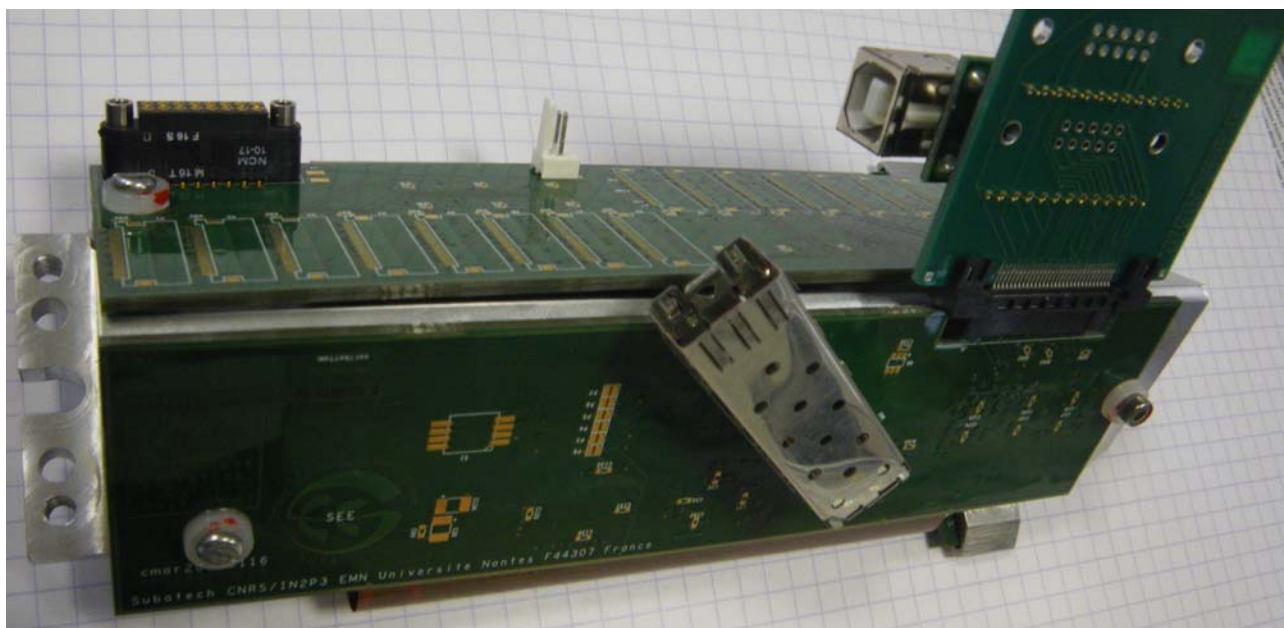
Mechanical test of prototype ladder card fixed on a fake ladder end and equipped with a debug card
